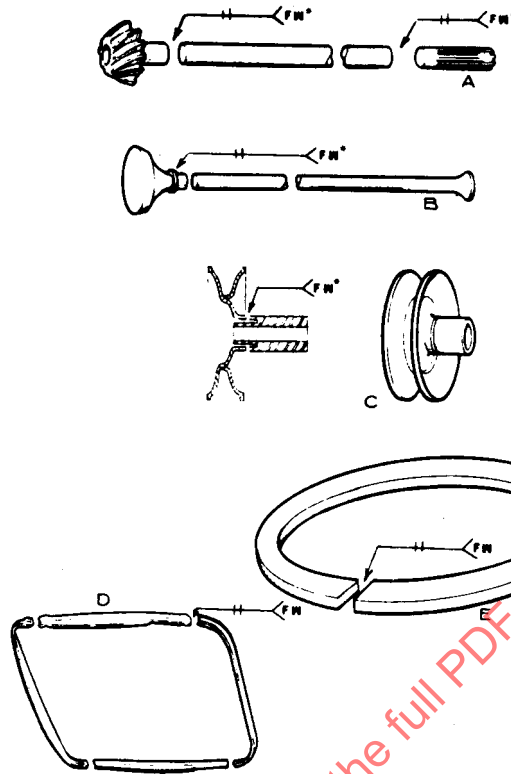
AUTOMOTIVE APPLICATIONS DESIGNED WITH GOOD FLASH BUTT WELDING FEATURES
